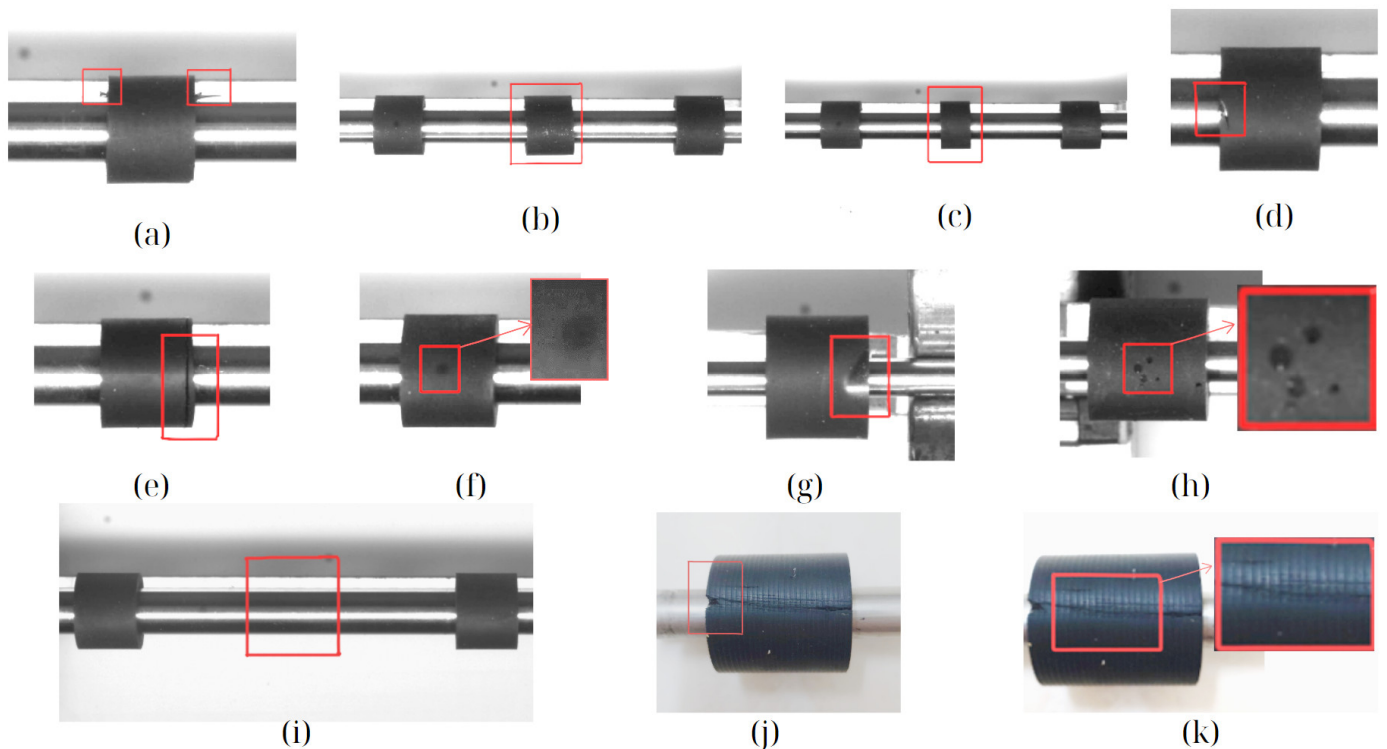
Typical defects on black rubber rollers: (a) flash defects; (b) reverse rubber; (c) smaller size rubber; (d,e) damage; (f) corrosion; (g) lack of grinding; (h) porosity; (i) no rubber rollers; (j) lack of material at the chamfer; and (k) scratches.
